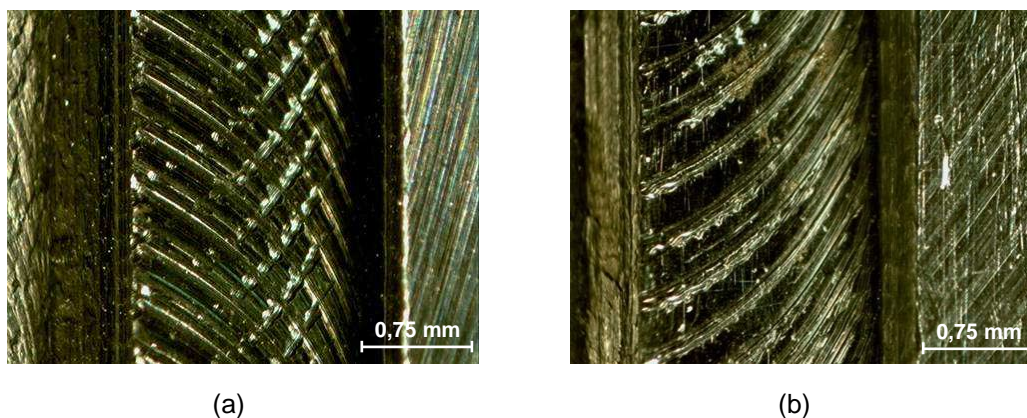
Surface texture of the material machined with coated tools: (a) milling with MQL, $vc = 60$ m/min, with new tool; (b) dry machining, $vc = 90$ m/min, with end of tool life.
